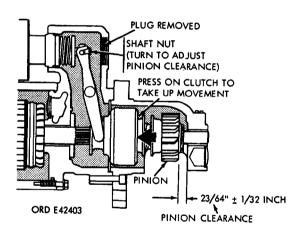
ADJUSTING DRIVE CLUTCH PINION CLEARANCE.
